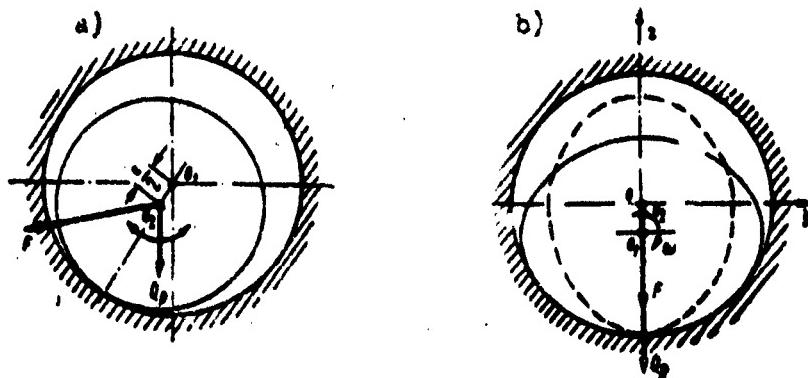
Rotor vibration due to (a) bearing clearance and (b) oval shape of shaft journal.
